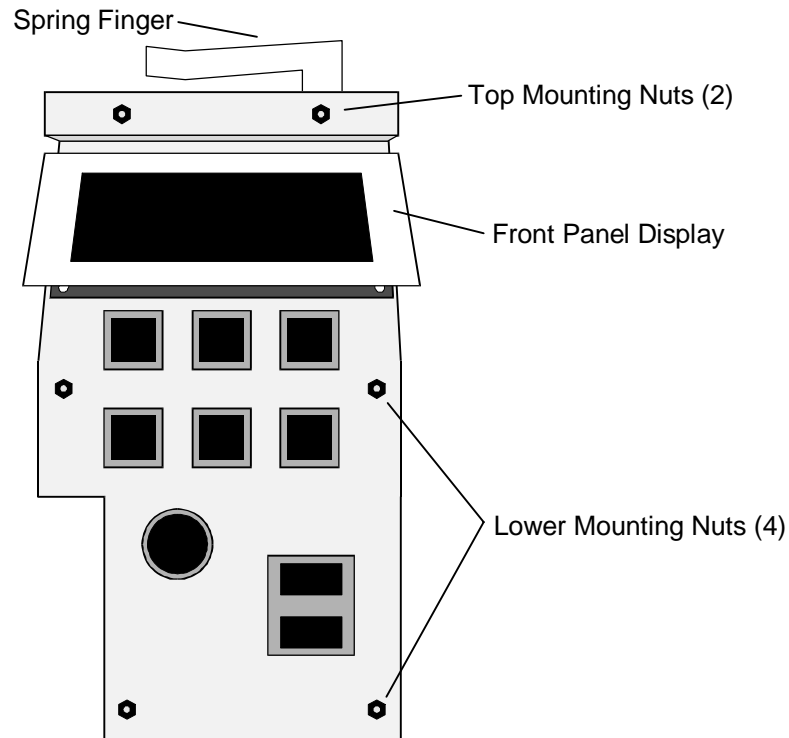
The Switch Bracket Assembly (Front Panel)
